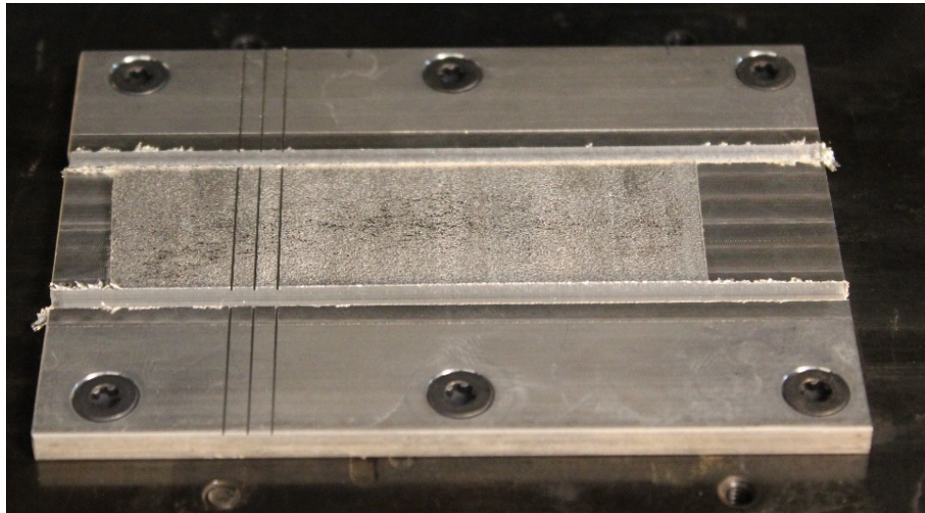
After one layer welded by UAM, three channels are machined.
